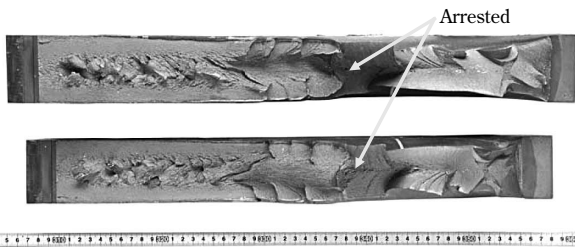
Fracture surface of specimen after ESSO test
